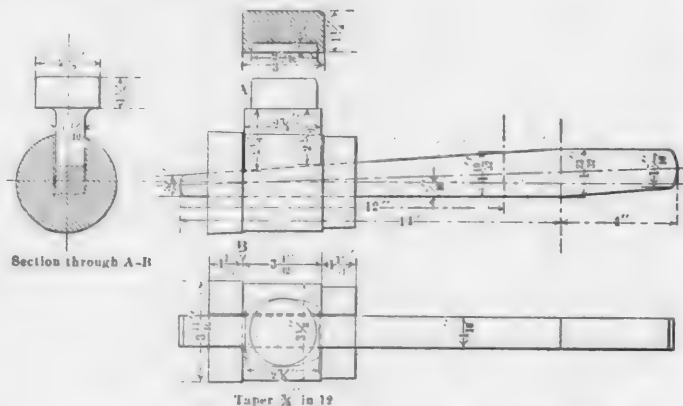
TOOL FOR REMOVING PISTON RODS FROM CROSS-HEADS.
